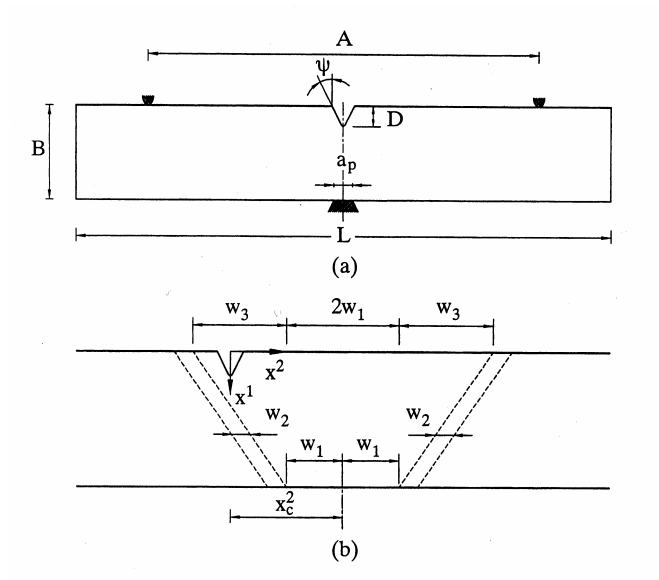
(a) Geometry of the Charpy specimen. (b) Geometry of the weld.
